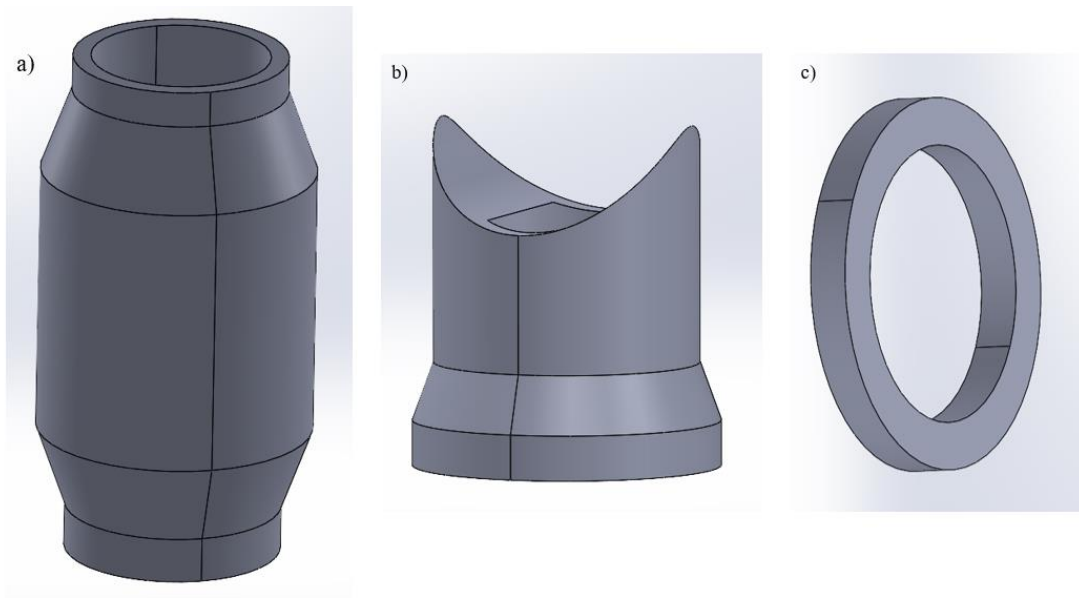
Three separate print stages developed from original model showing a) the top tube section, b) the base tube section, and c) the flange section.
